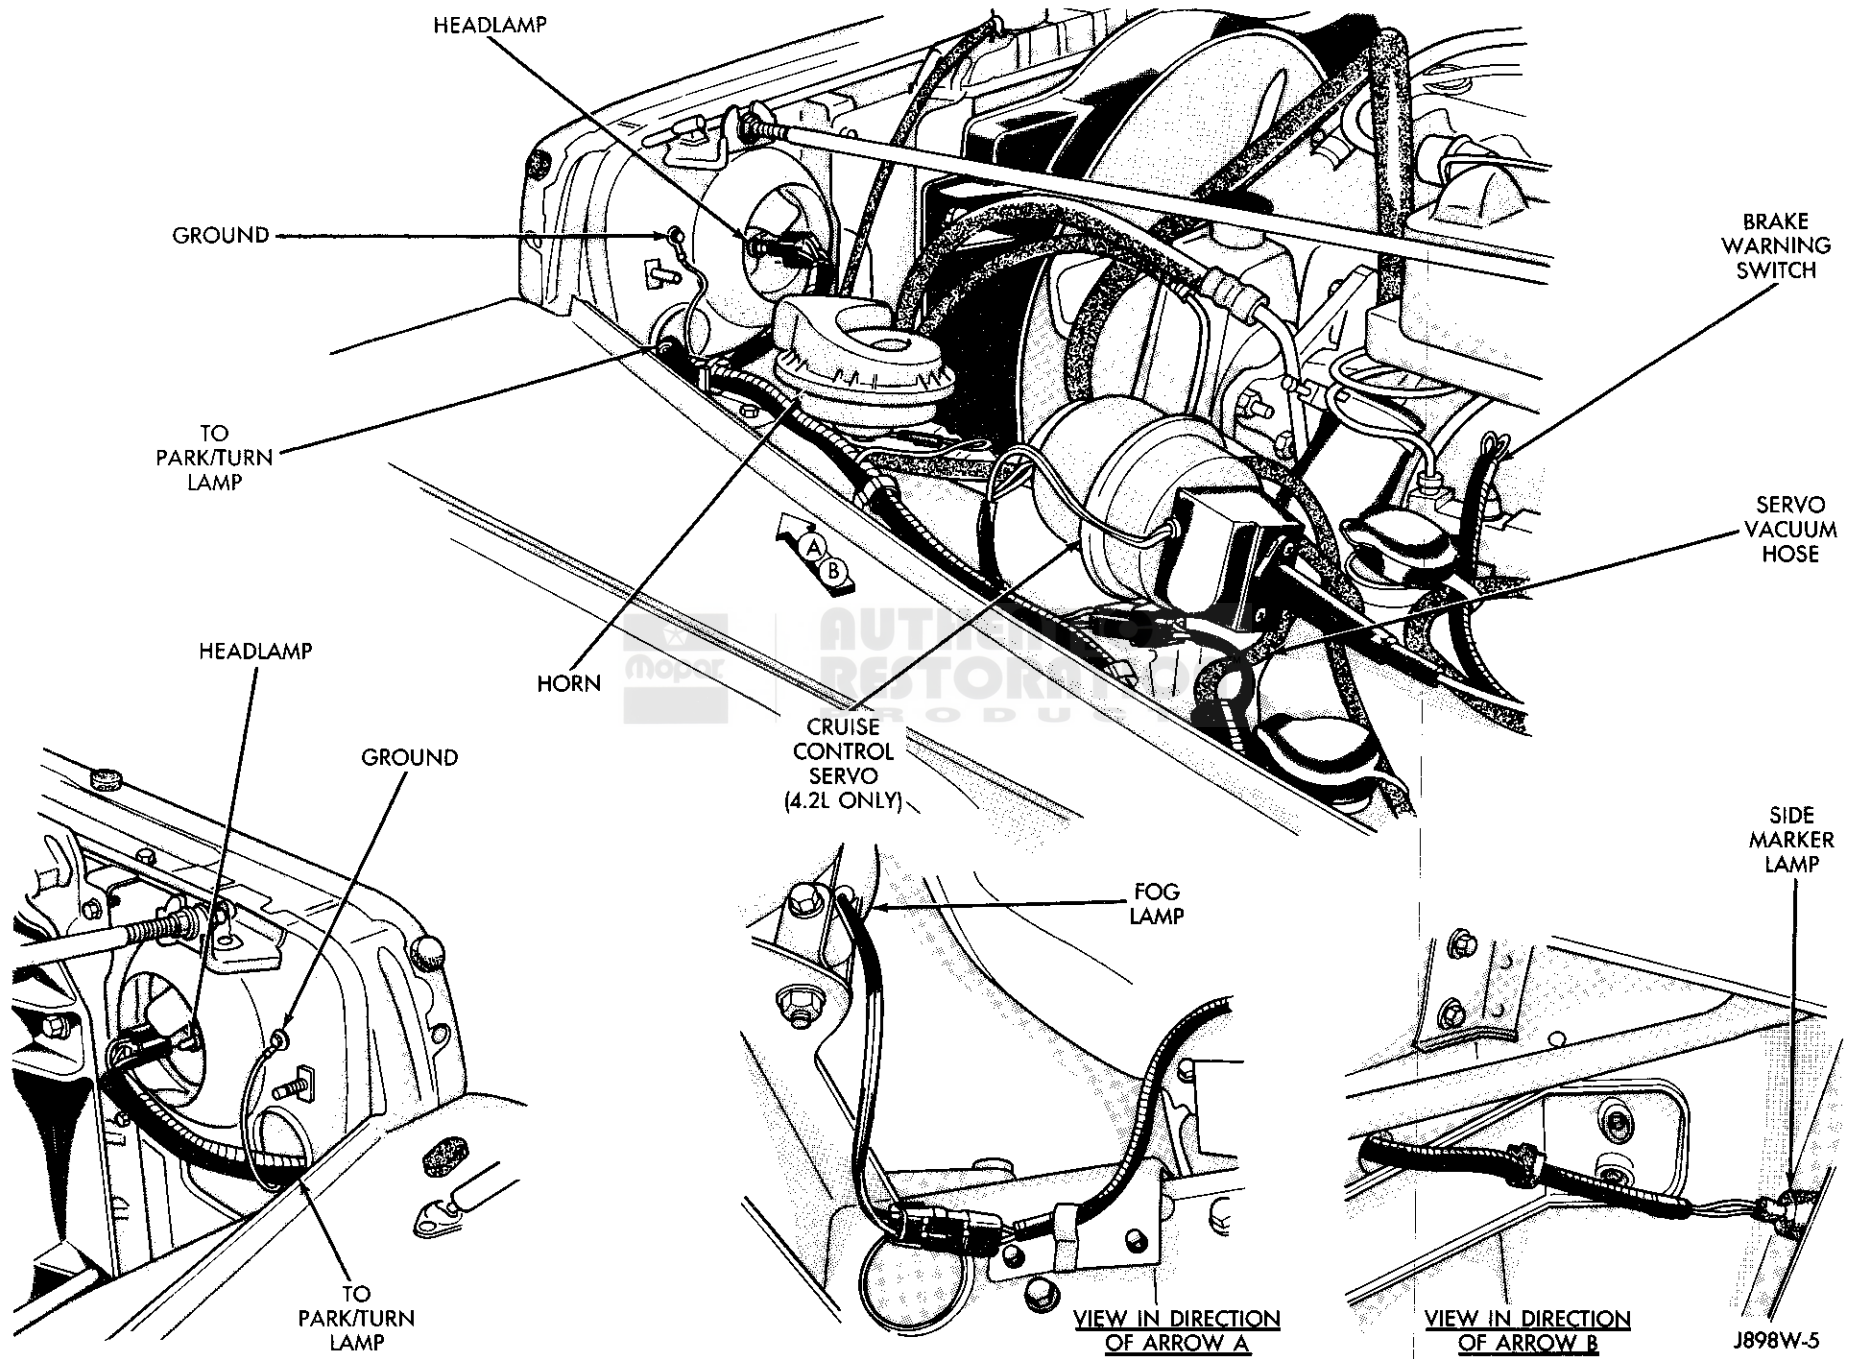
Engine Compartment Wiring 2.5L Engine — YJ
